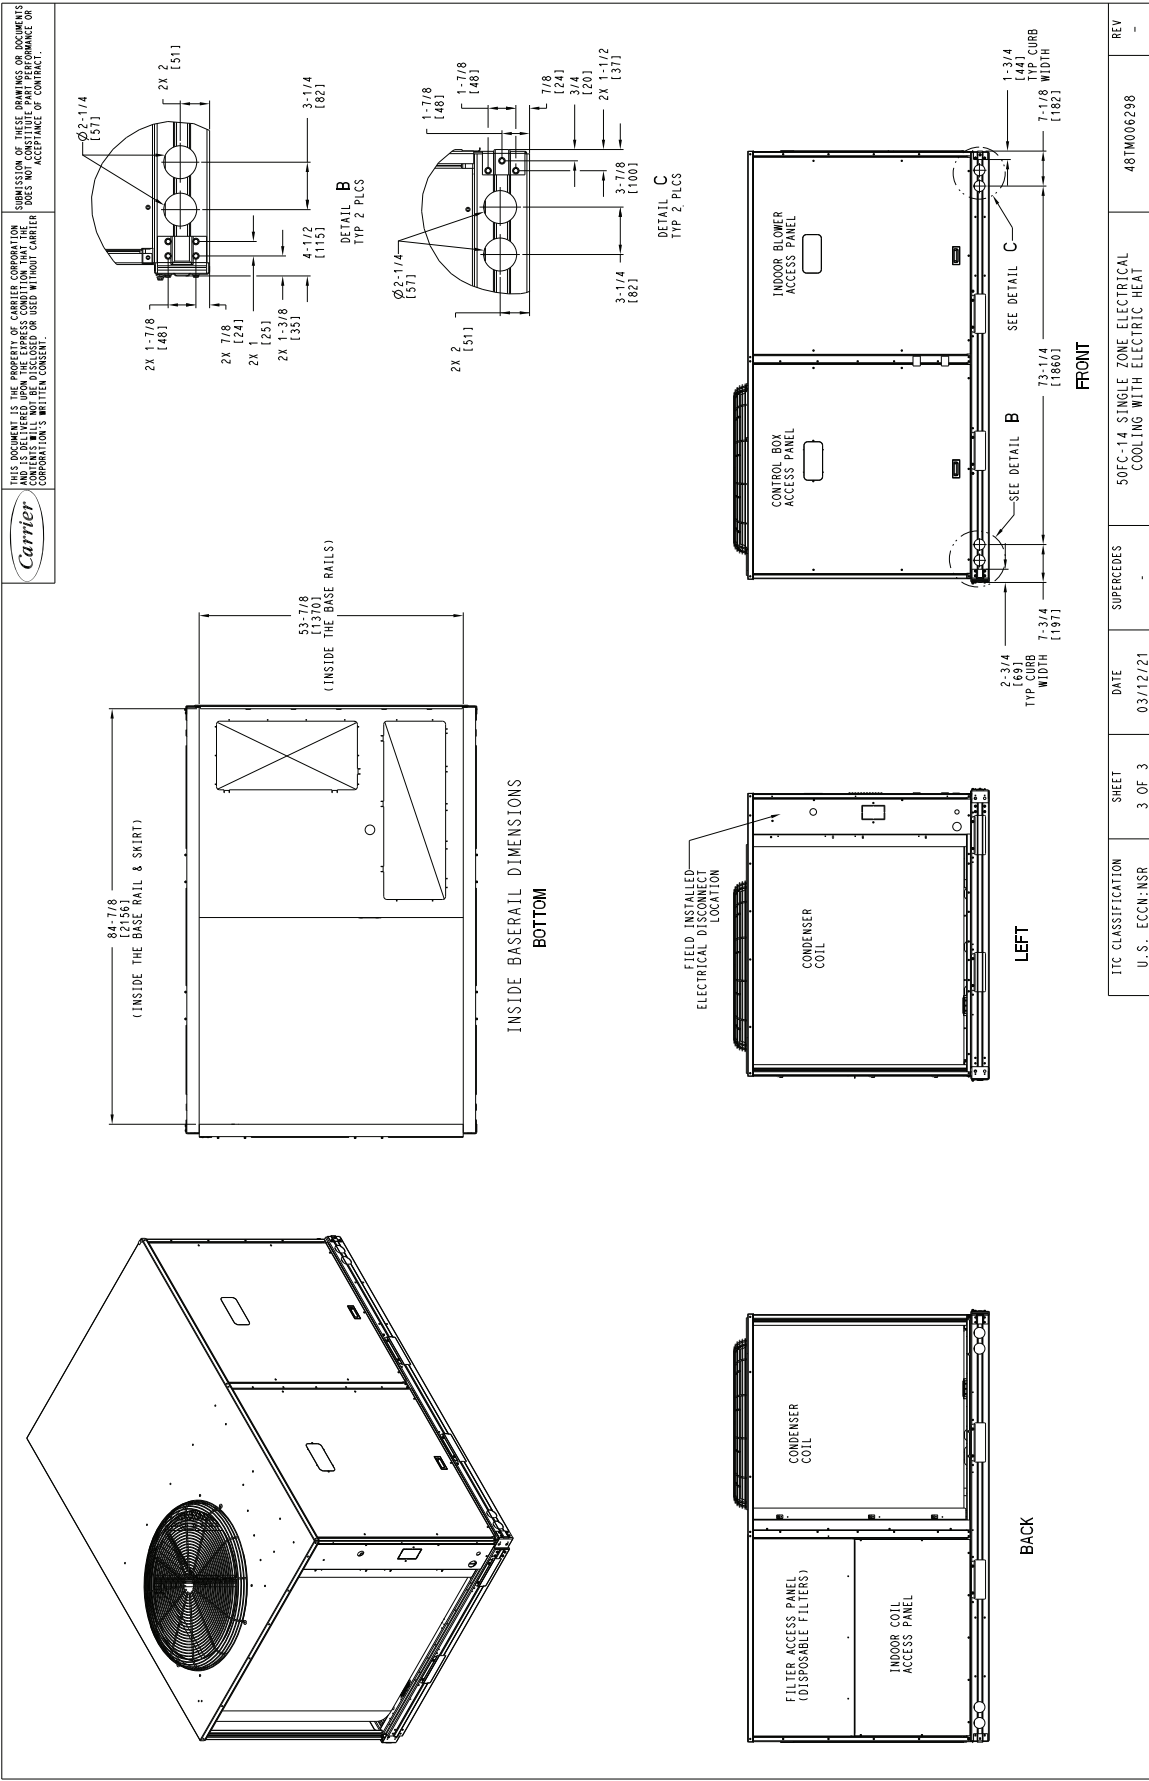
50FC14 Dimensional Drawing (cont)
